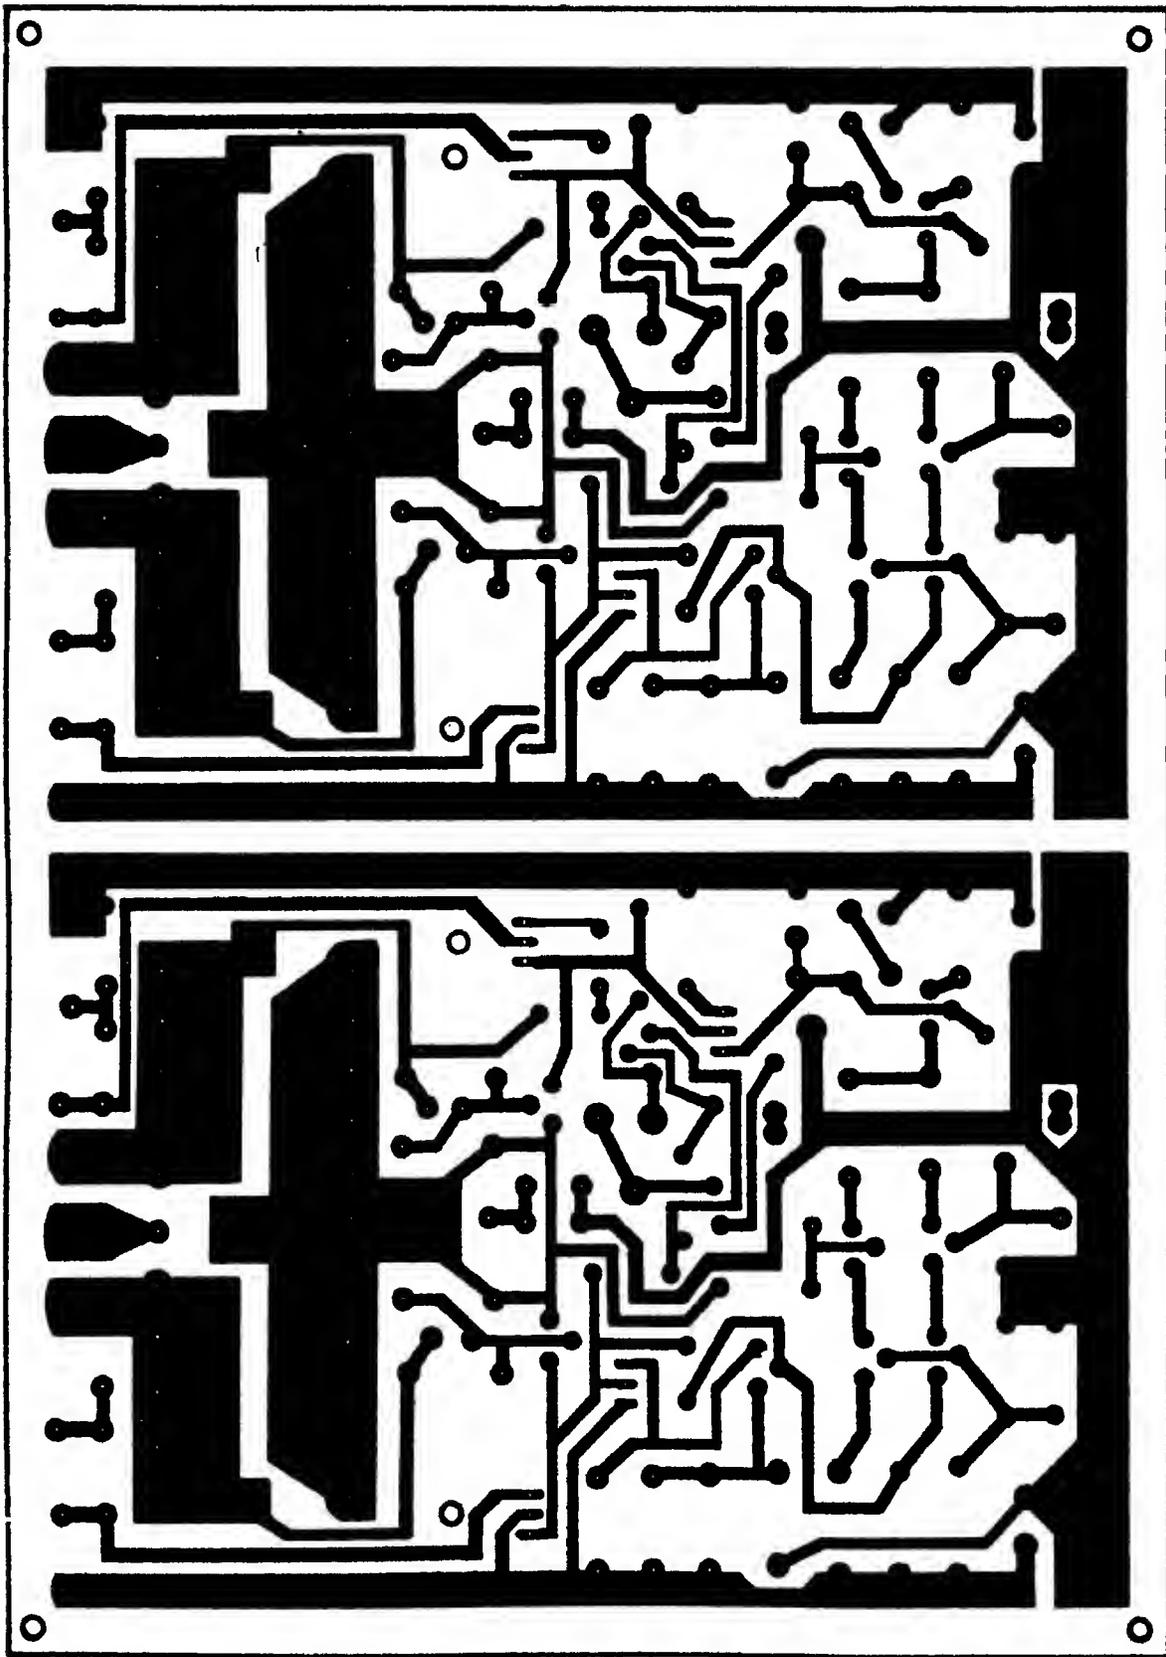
PCB layout for 120W + 120W stereo amplifier.
